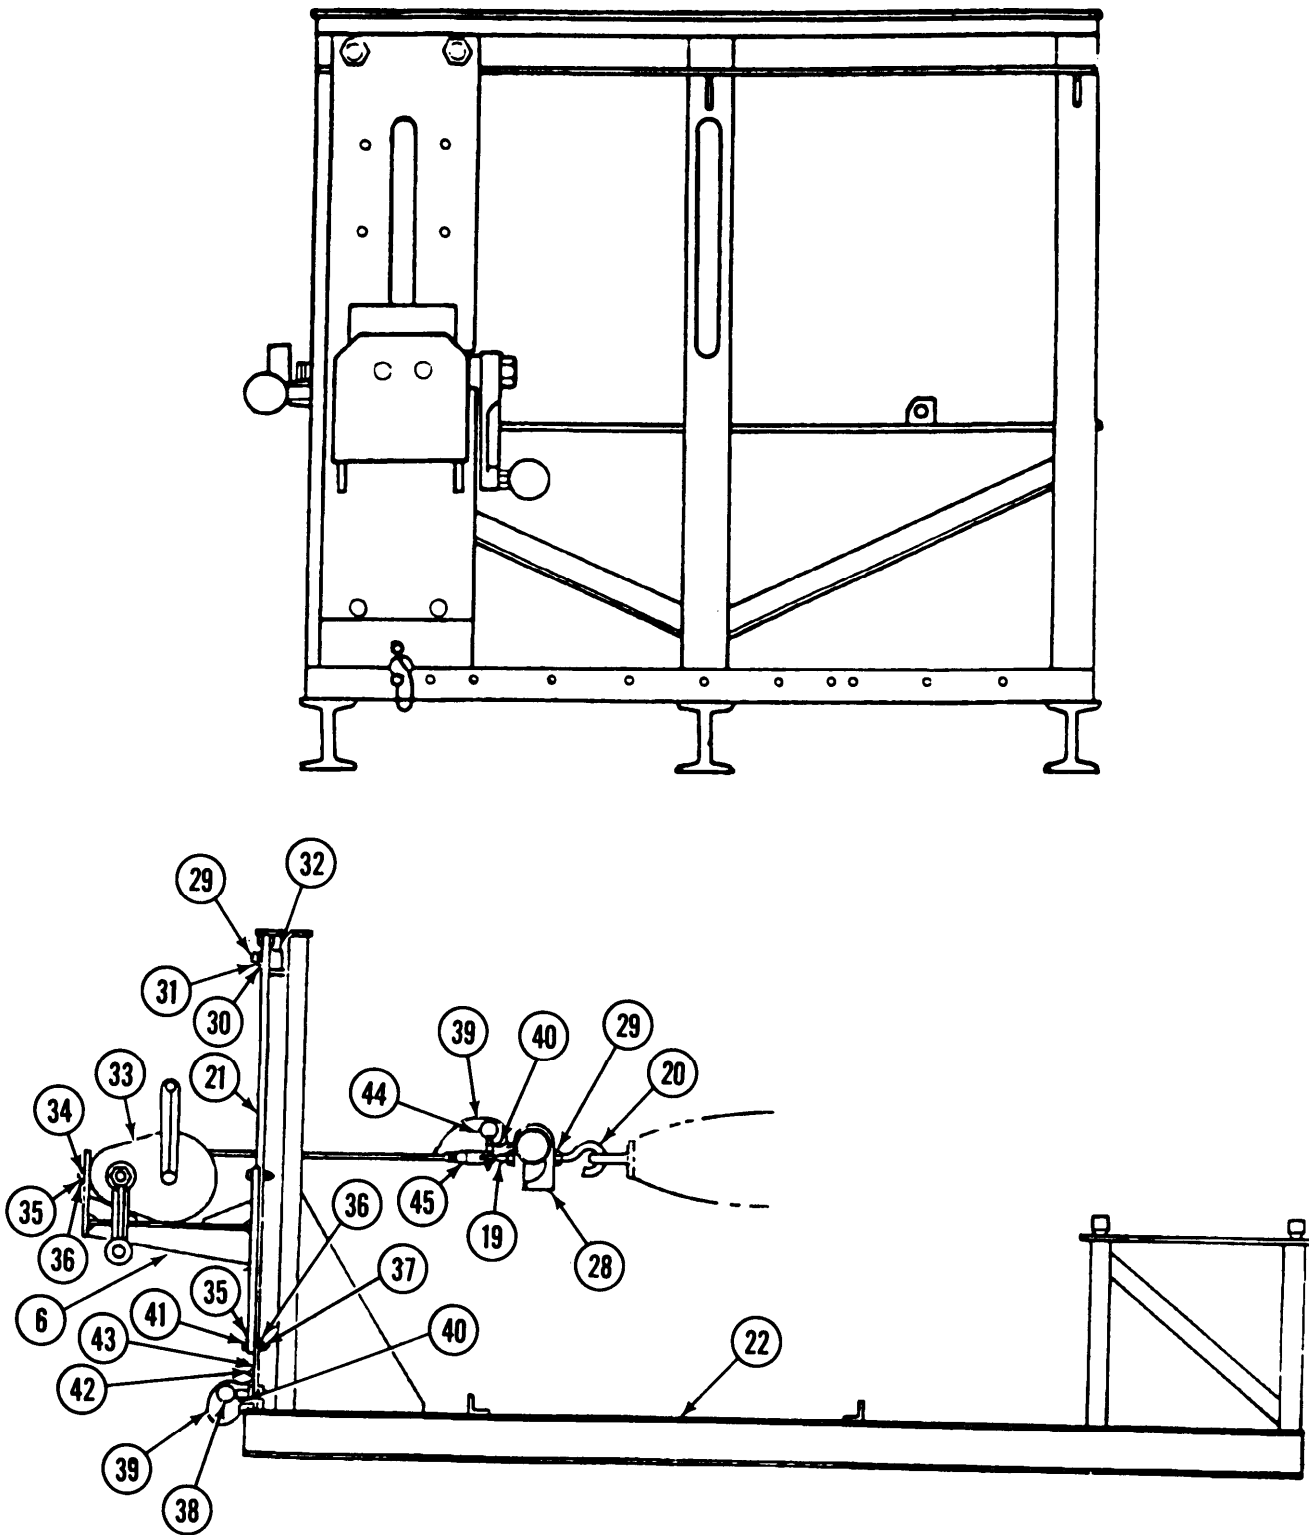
Projectile Rack Section Test Stand-Ammo Rack Pull Test Fixture
